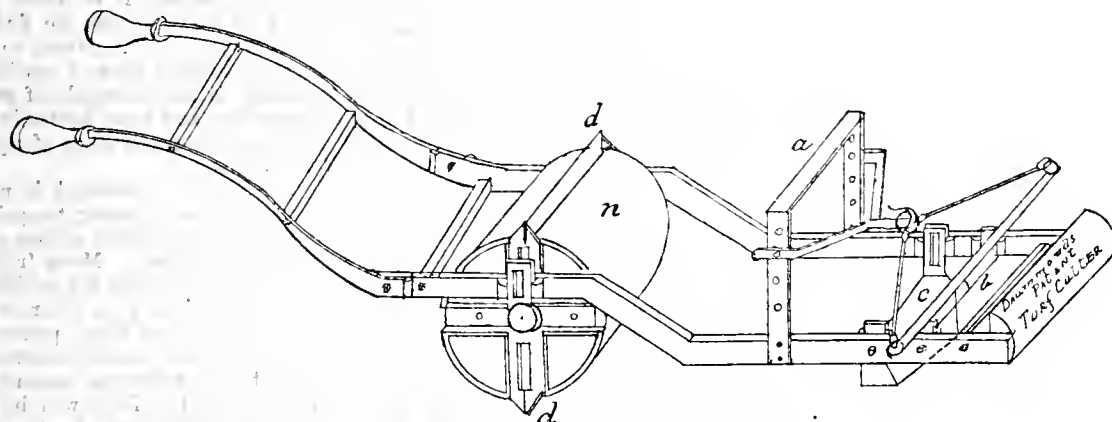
DRUMMOND'S TURF-CUTTING MACHINE.
